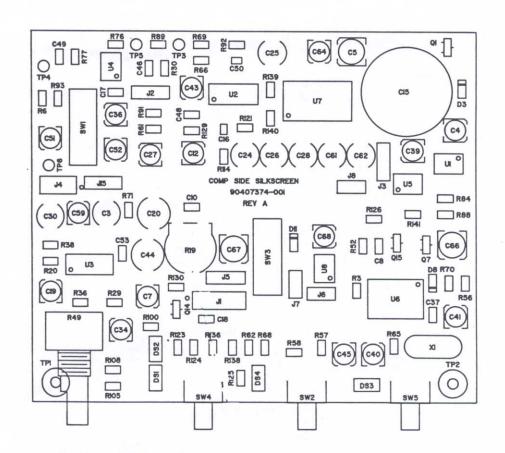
BP-350 PC Board Assembly 9030-7487-000
